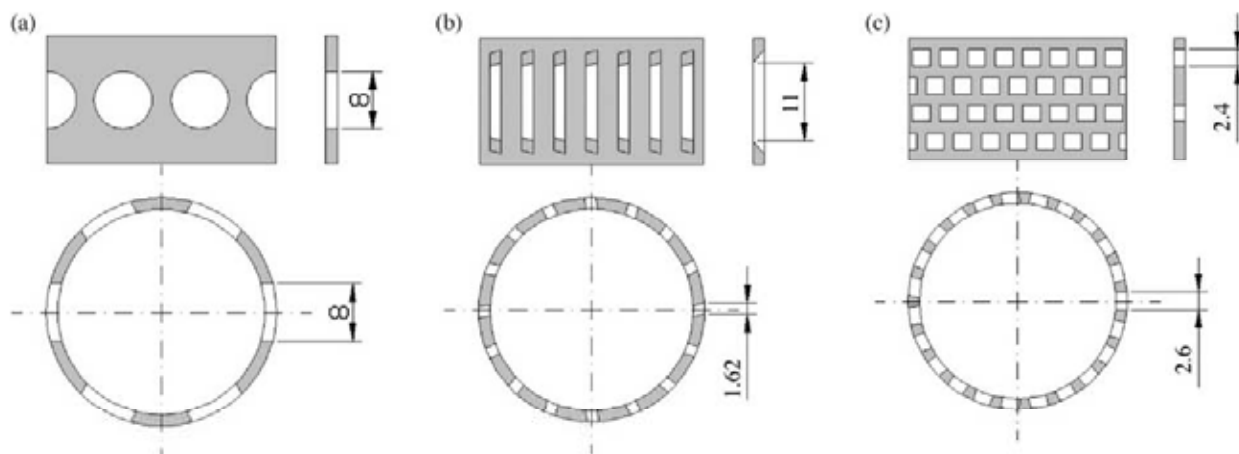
Stator geometries investigated in this work: (a) disintegrating head, (b) slotted head and (c) square hole head.
